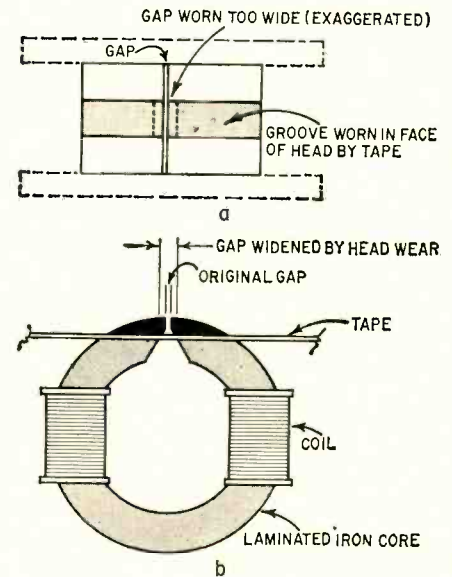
Face of head should always be shiny. Dust causes wear apparent after head is cleaned.
